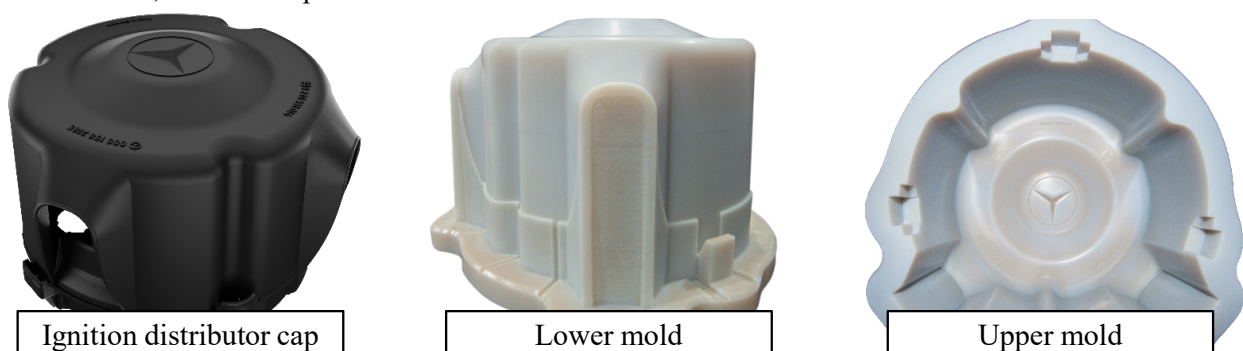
Ignition distributor cap (spare part) and AM injection molds
